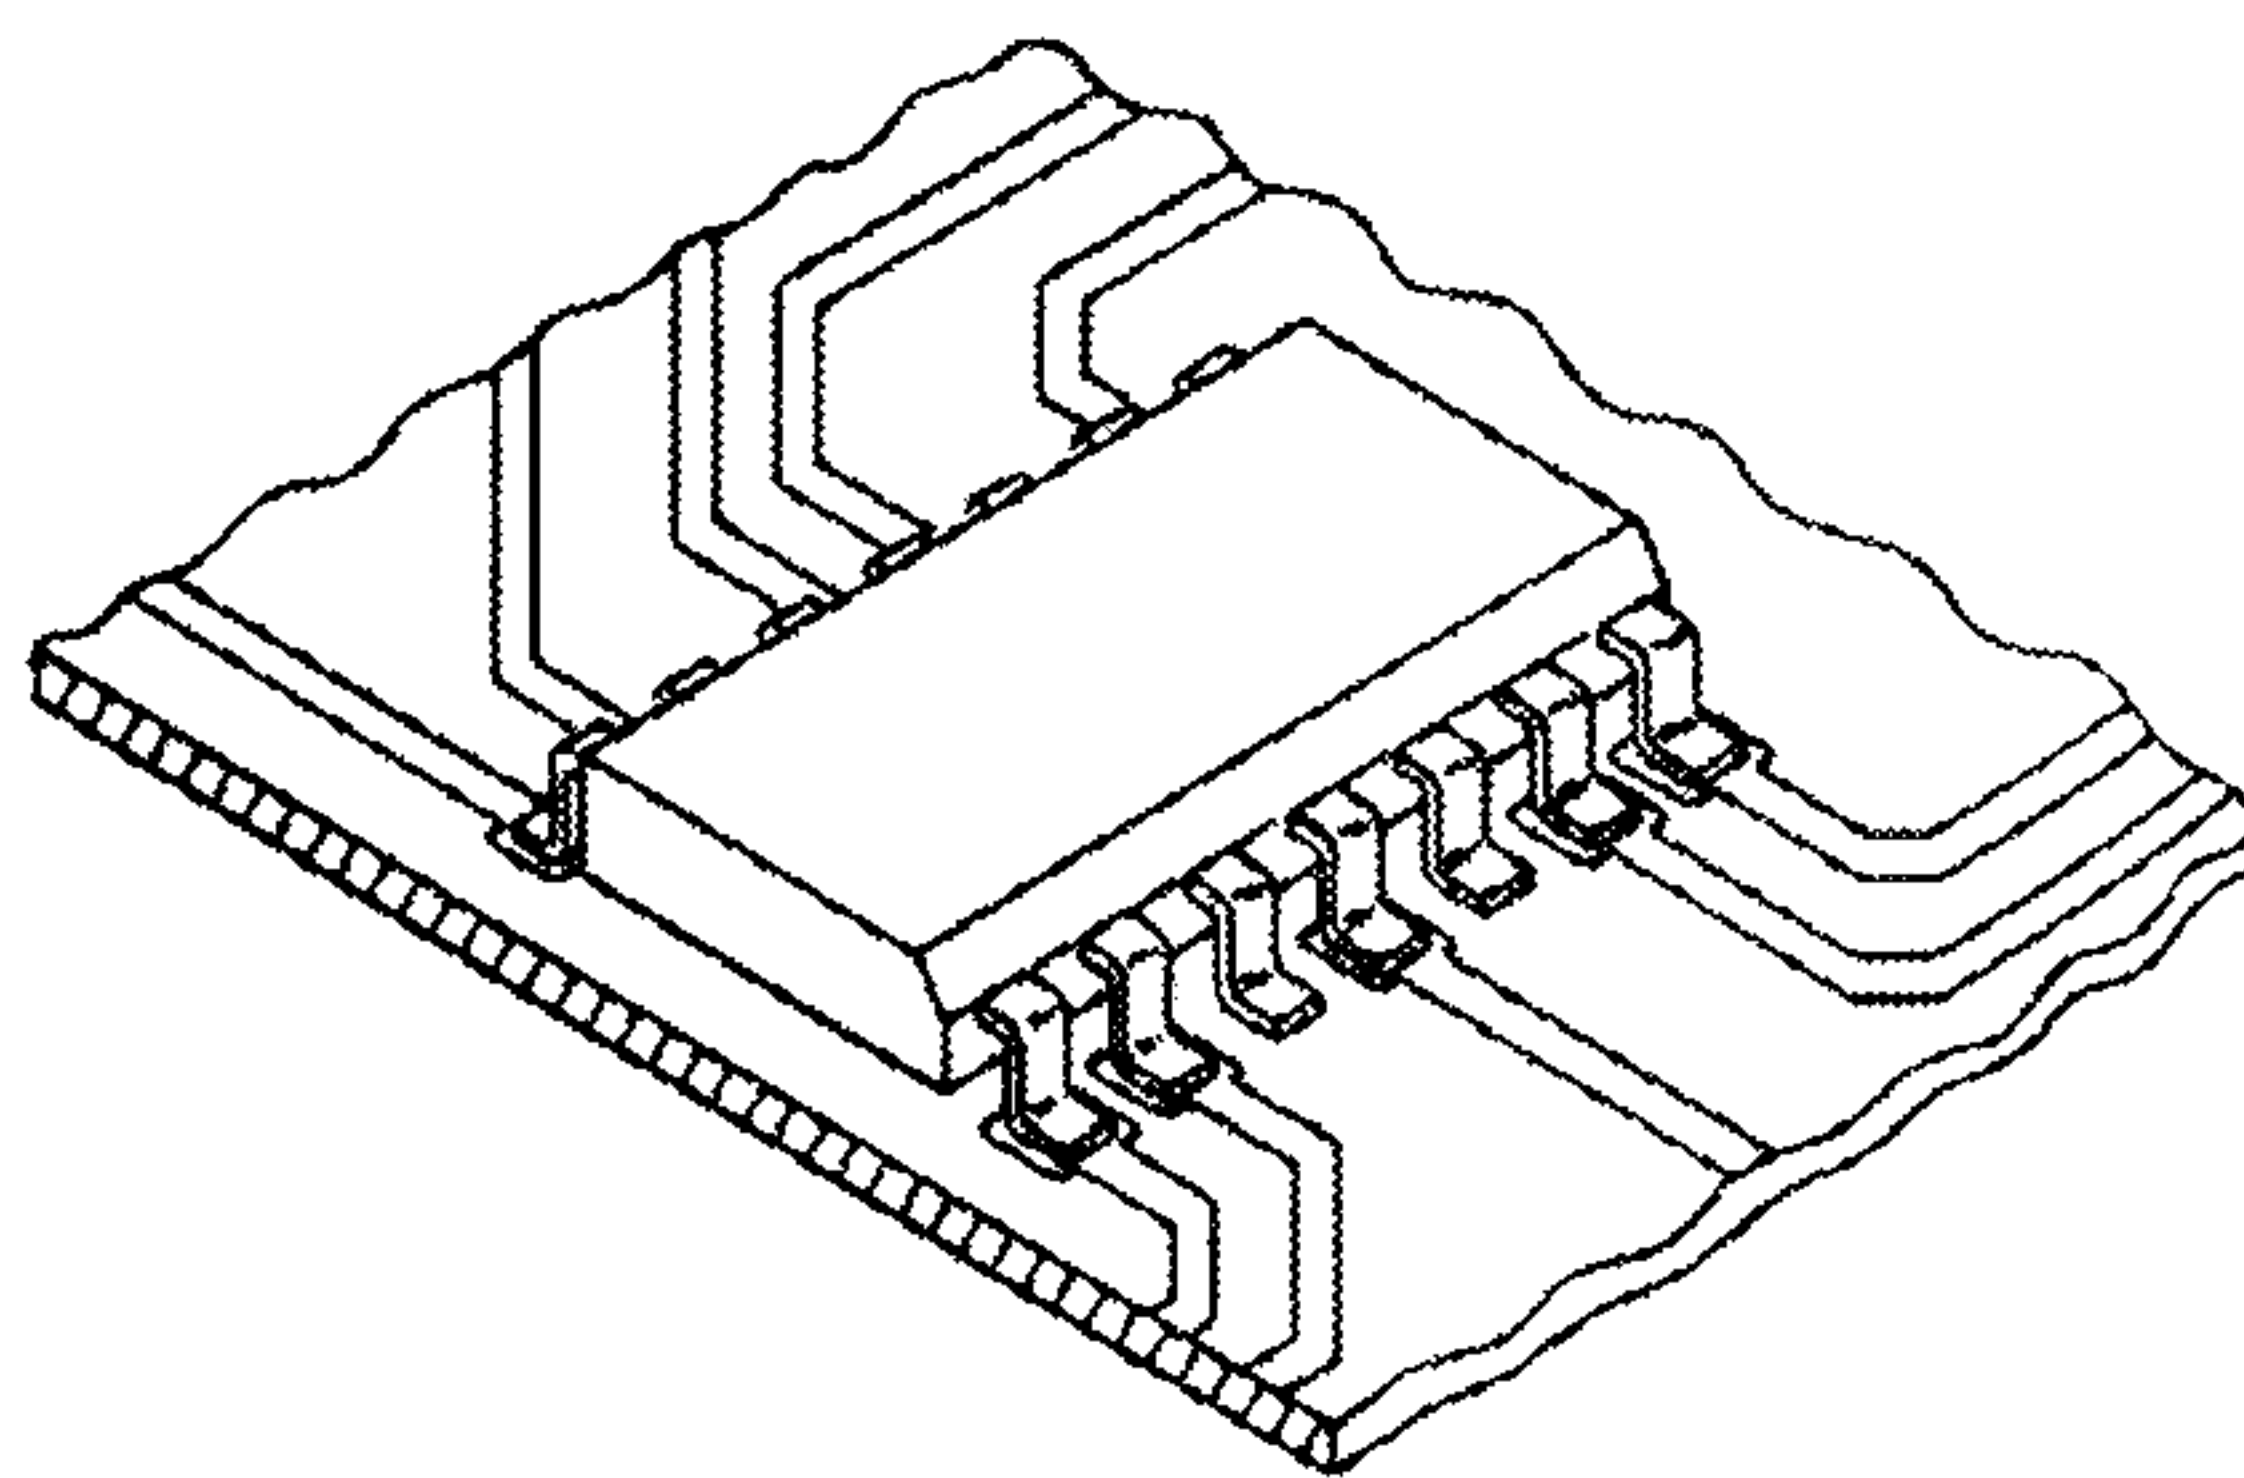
Surface mounting of a SOIC package onto a PCB.
